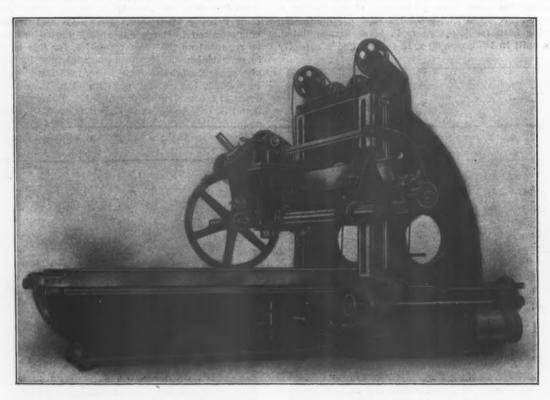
A Special Combined Horizontal, Vertical and Angular Spindle Ingersoll Milling Machine.
